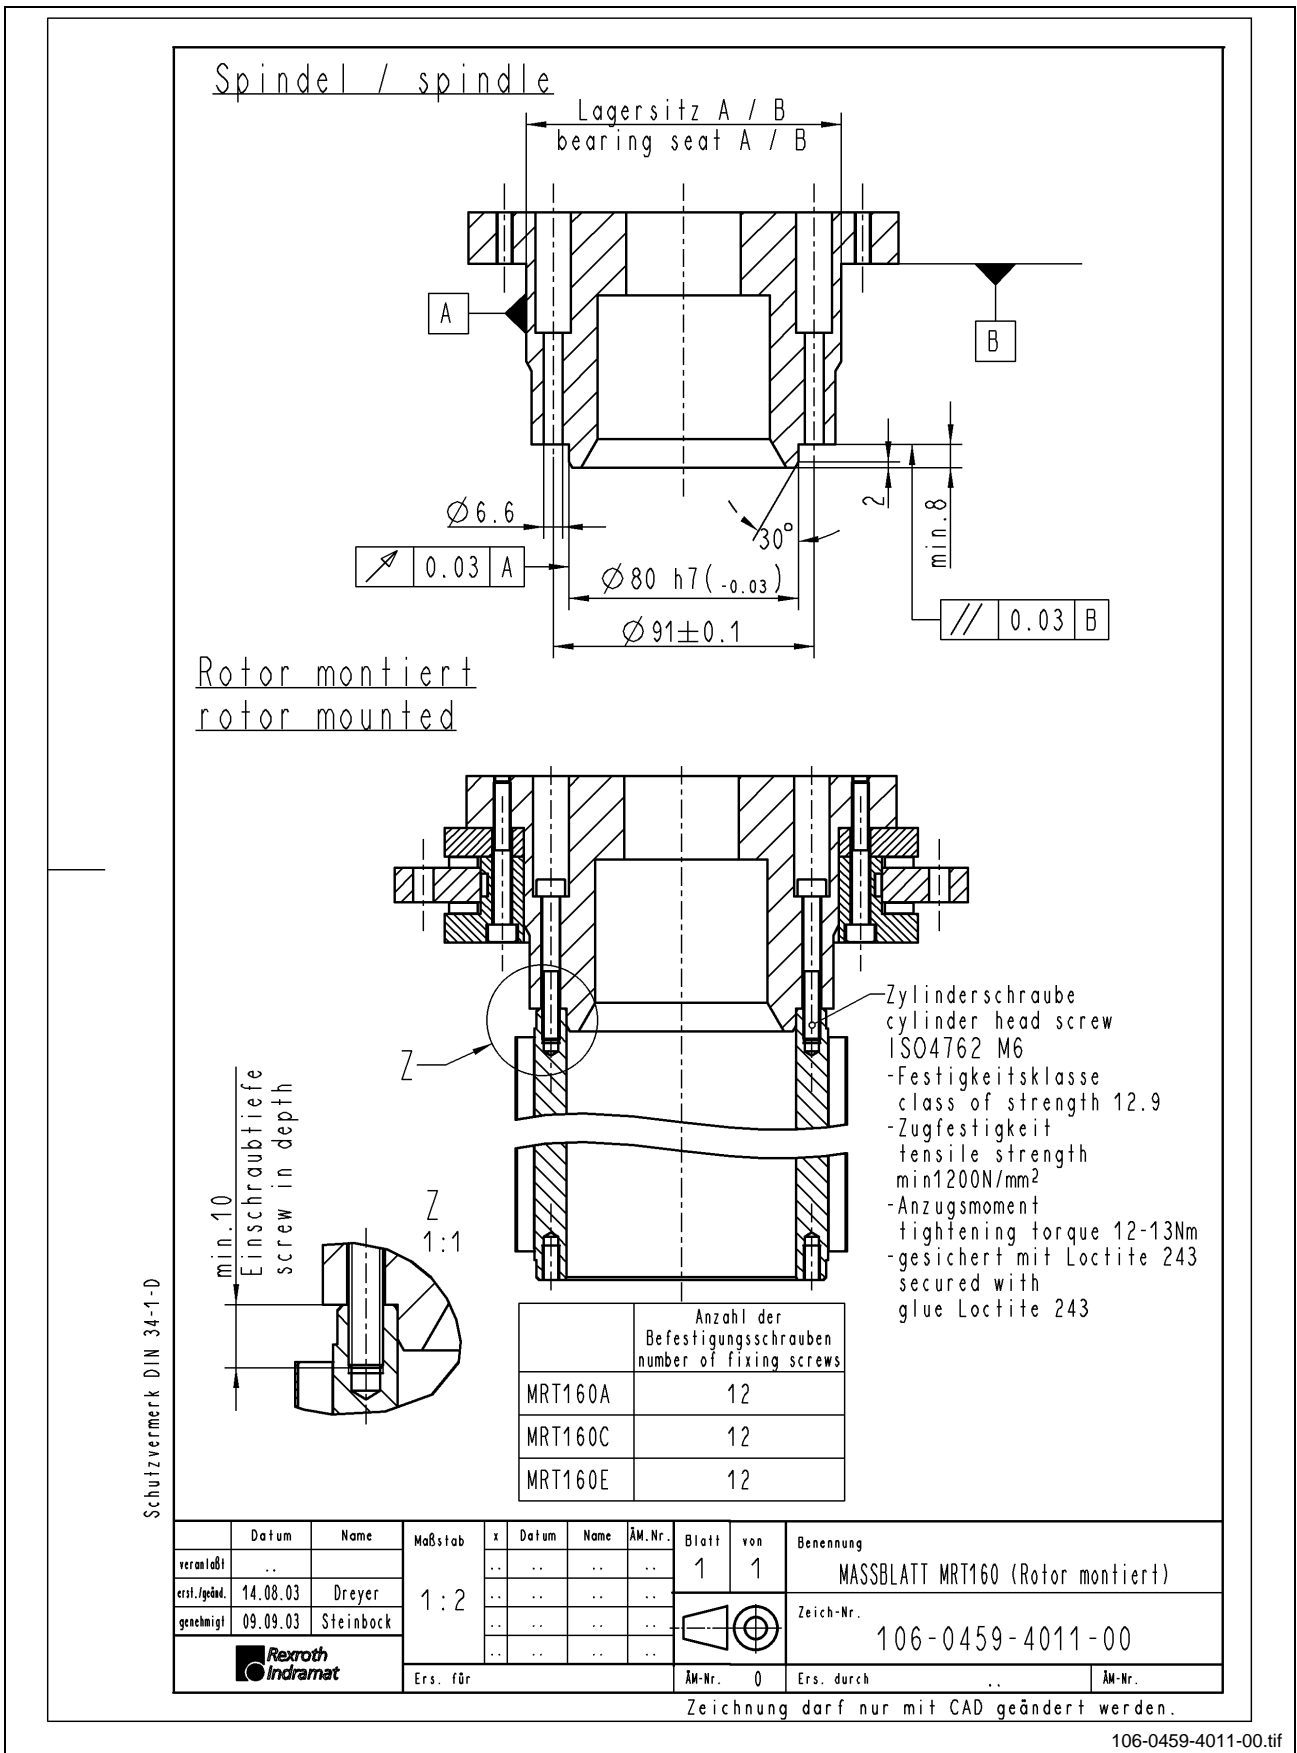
Dimension sheet Rotor MRT160, mounted
